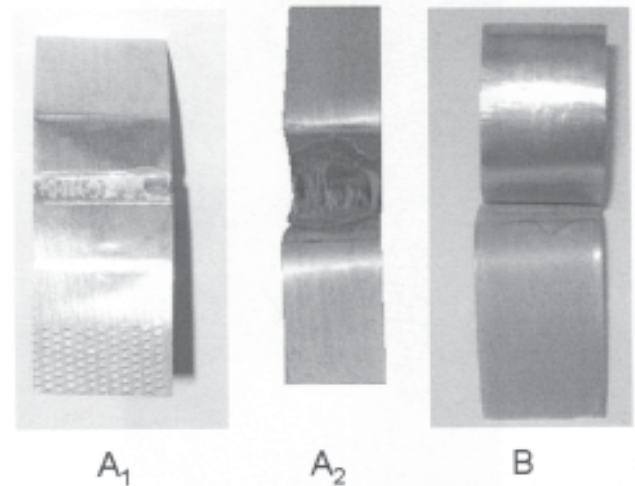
Fracture of adhesive assemblies between rigid substrates A. Al substrates; B. Al/steel A₁ – initiation of the fracture process; A₂ – fracture of the adhesive assembly
